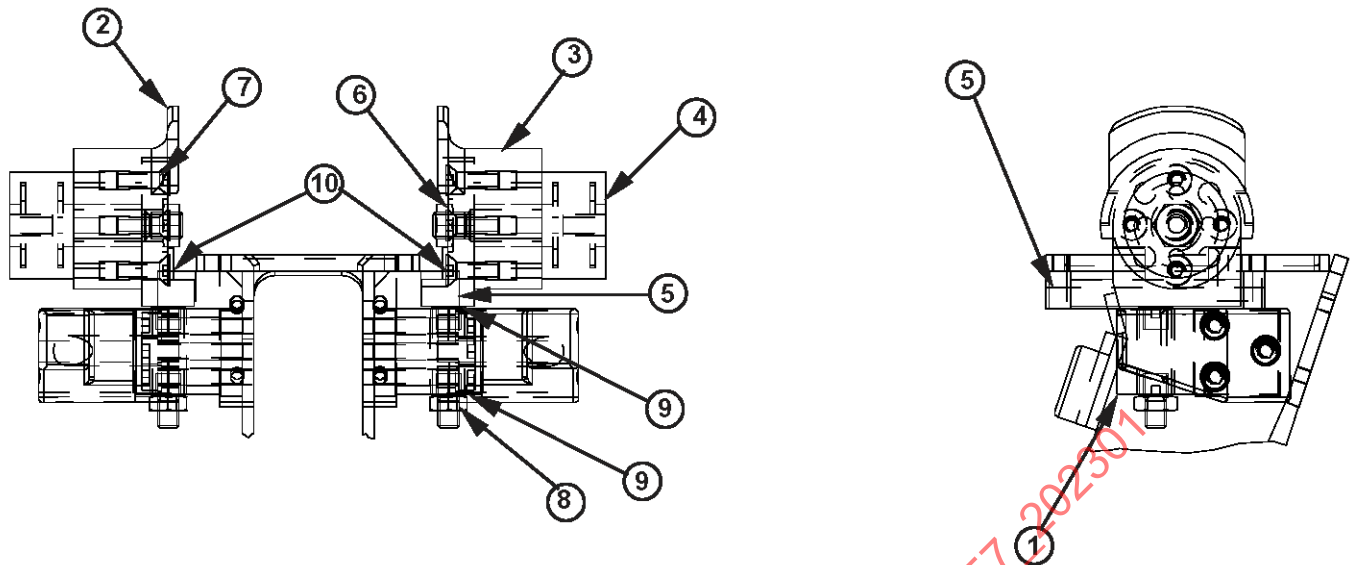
COMPLETE SHOULDER ASSEMBLY
